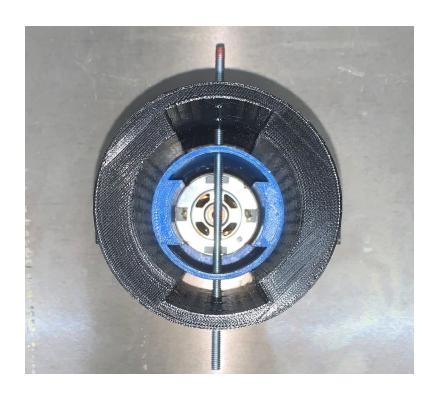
Top View of Cutting Height Adjustment Mechanism
